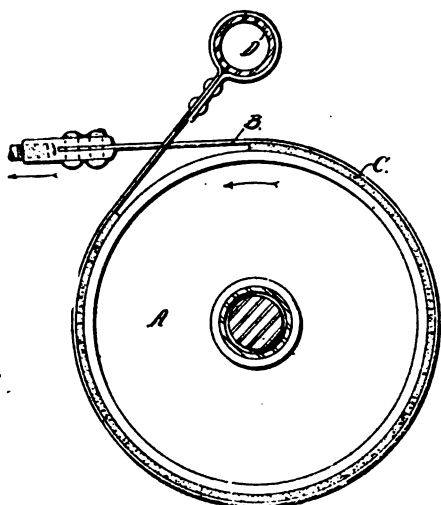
SINGLE-ACTING BAND BRAKE.
